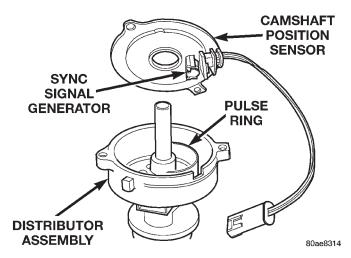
Distributor and Camshaft Position Sensor-Typical
